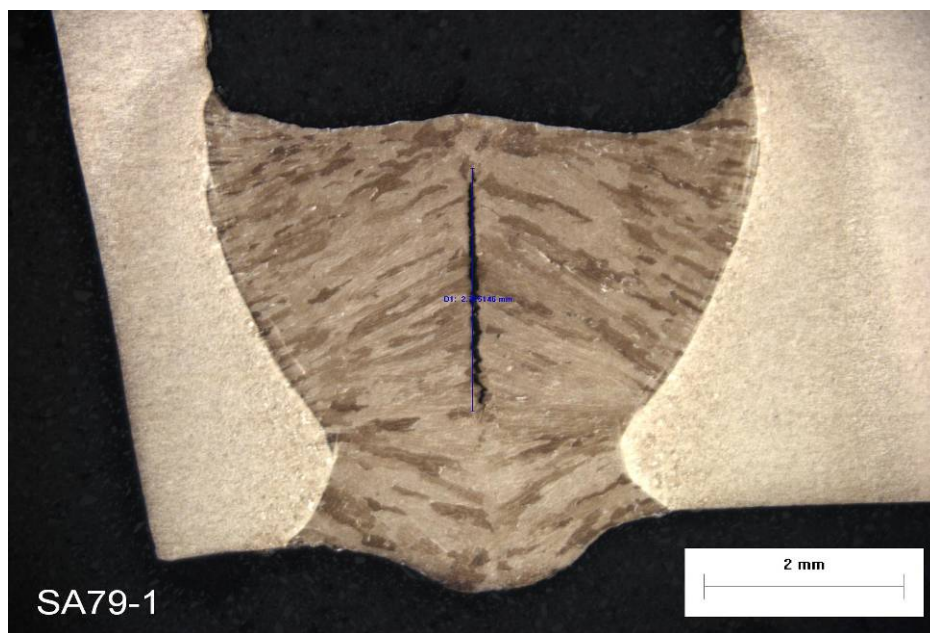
Macrosection of Weld SA-79 Showing Subsurface Centerline Hot Crack
